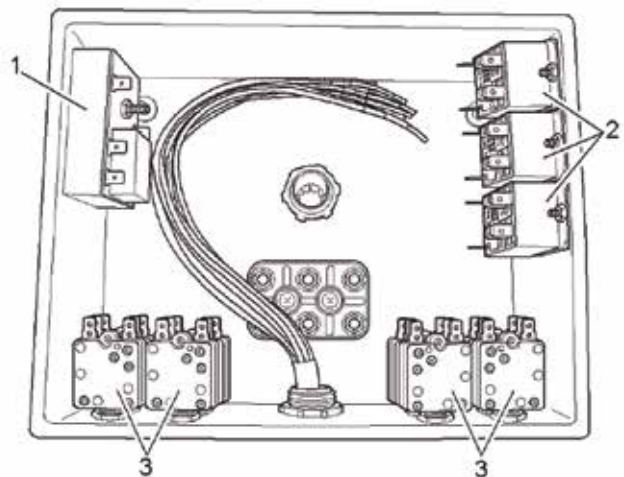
Electric Heat Control Box Before Wiring Completed
